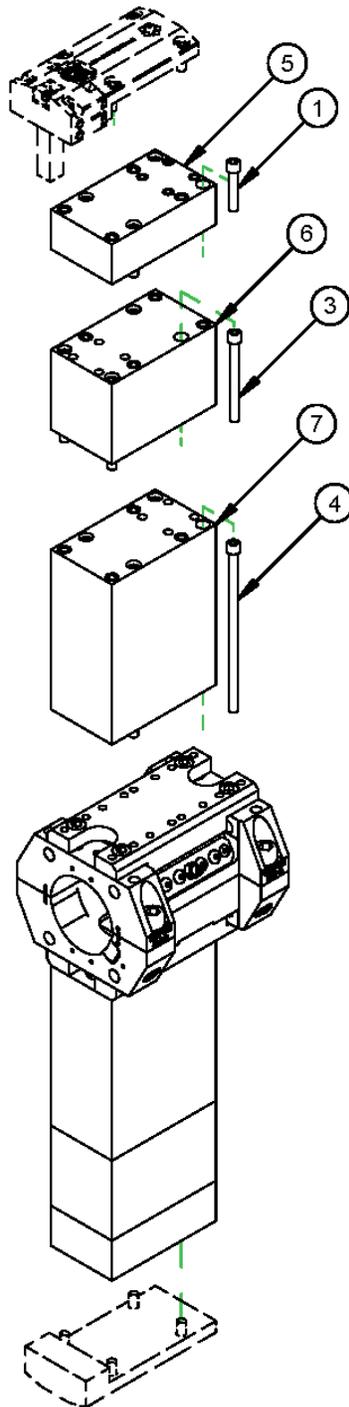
MICRO ADJUST BORING HEAD ASSEMBLY (P/N 79325)
